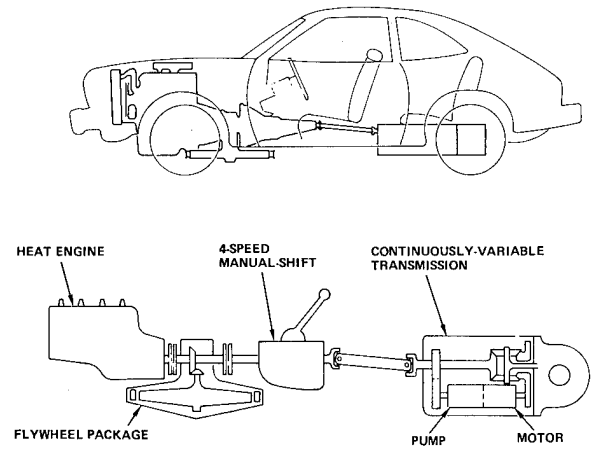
University of Wisconsin Pinto conversion using multiple thin-disc flywheel.
